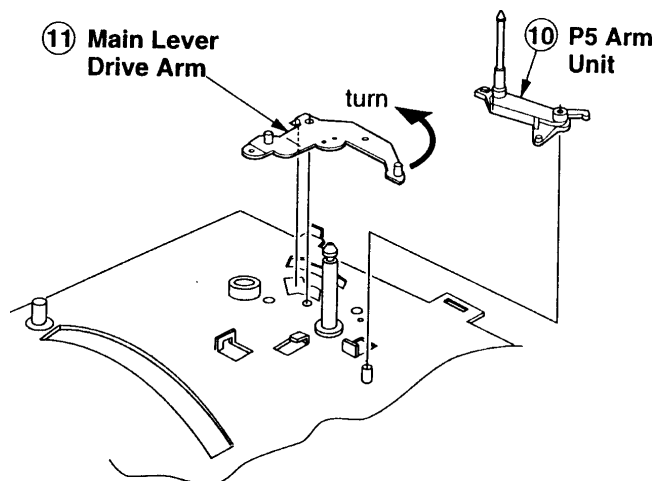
P5 Arm Unit/Main Lever Drive Arm Removal
